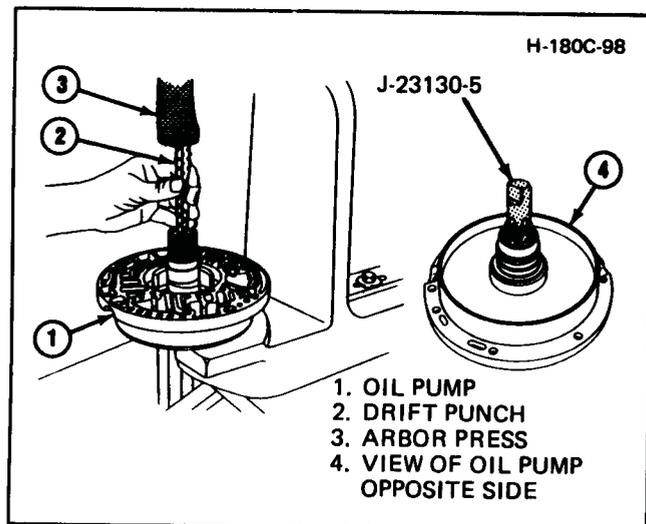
C-98 Removing Oil Pump Bushing - Rear (Inner)
